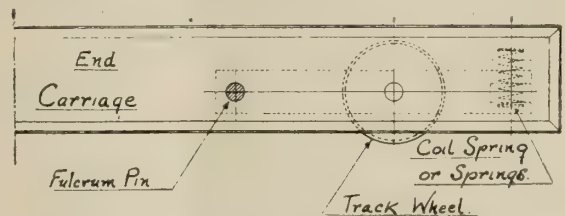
DESIGN AND EQUIPMENT OF CRANES.
